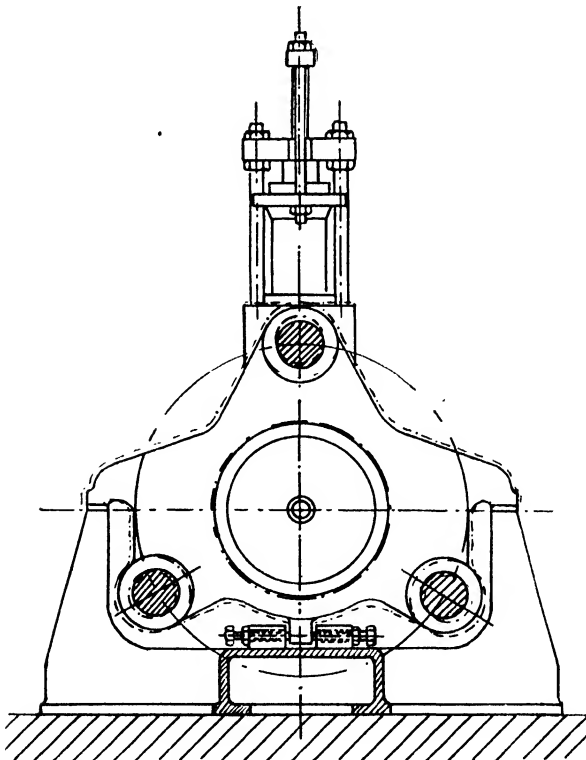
Press-head carried on stools lying coplanar with press axis to distribute thermal expansion equally.
